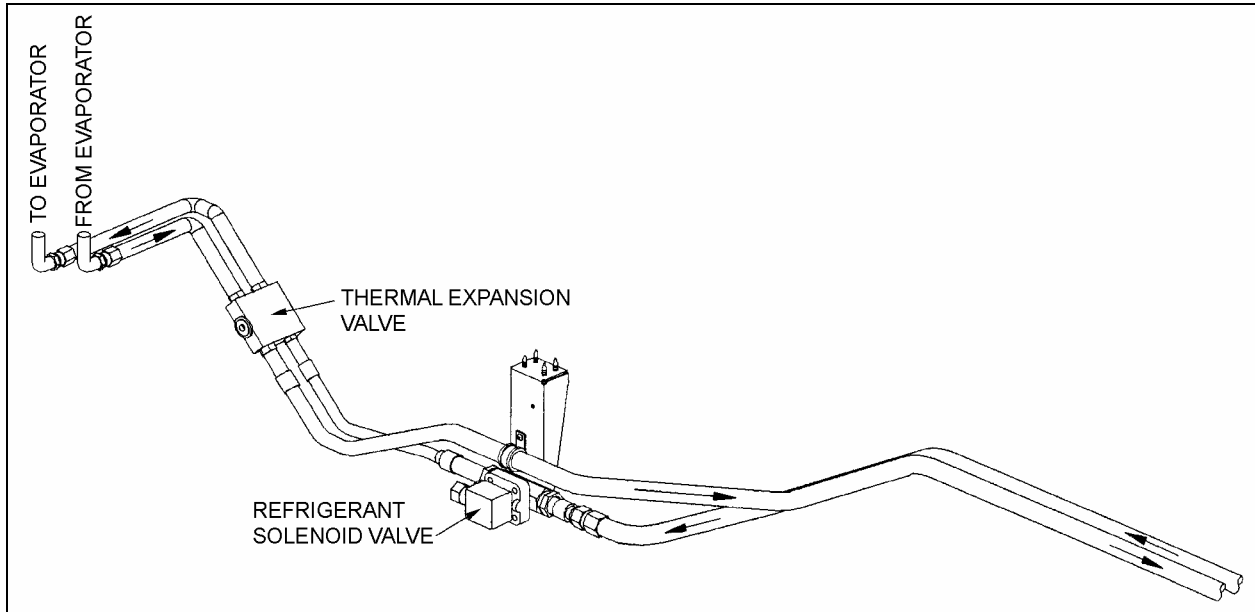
FORMER INSTALLATION – FRONT SECTION
